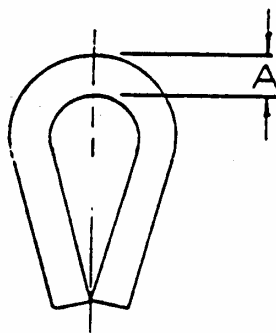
BEND TEST OF VACUUM BRAKE HOSE
